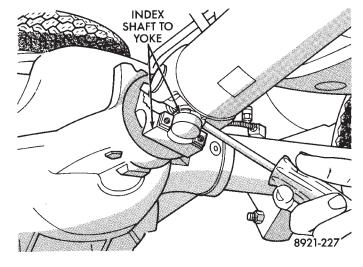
Mark Propeller Shaft And Yoke For Alignment Reference
